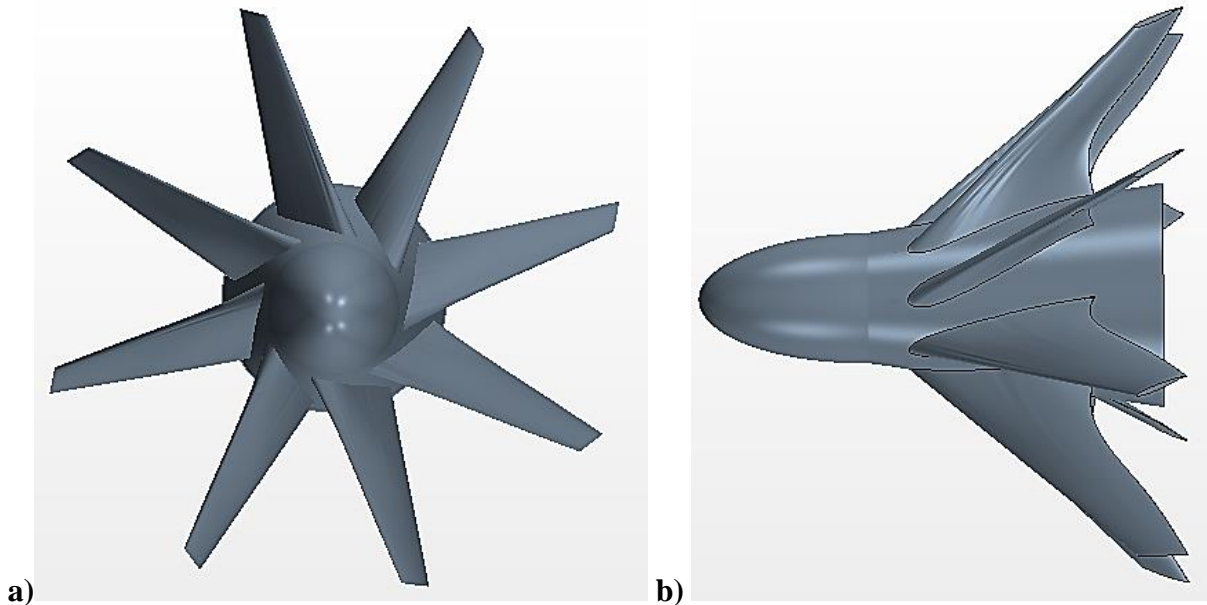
SR-7A propeller with spinner a) Front view; b) Side view
